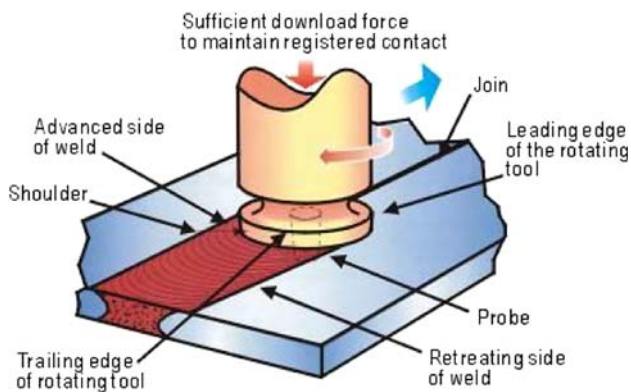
Schematic of friction stir welding (Ref 2)
